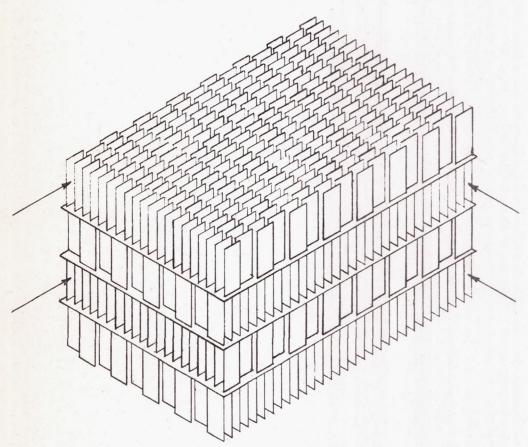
Method of using staggered heat-transfer surfaces in a cross-flow heat exchanger.
